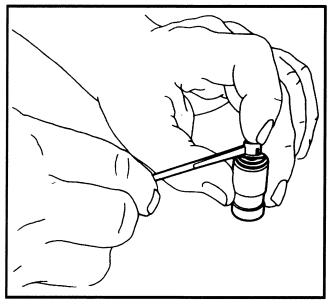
REMOVE THE CHECK BALL ASSEMBLY
